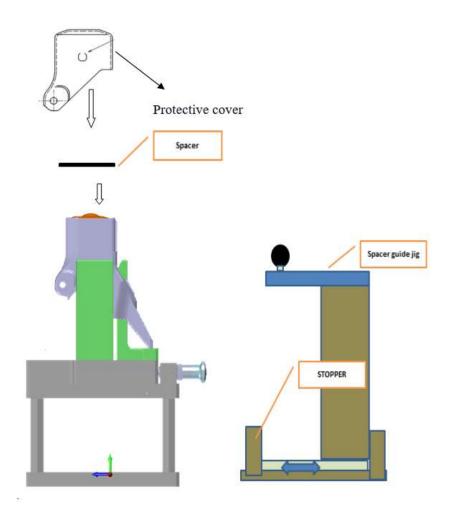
Rough sketch of idea of SPACER & PROTECTIVE Assembly jig.
